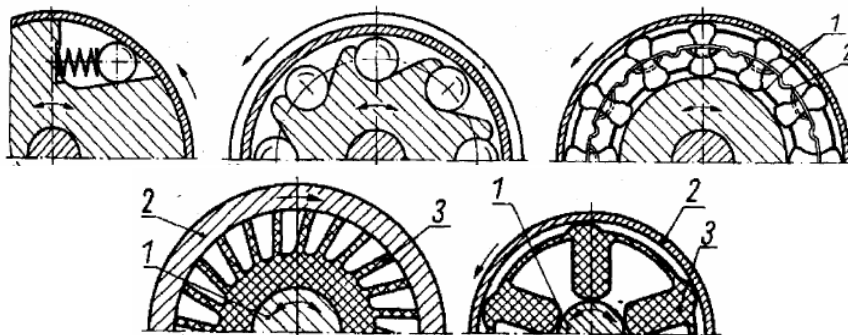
Free-running clutches – wedging rigid roller type, closure body type and elastomer disk type [4]
